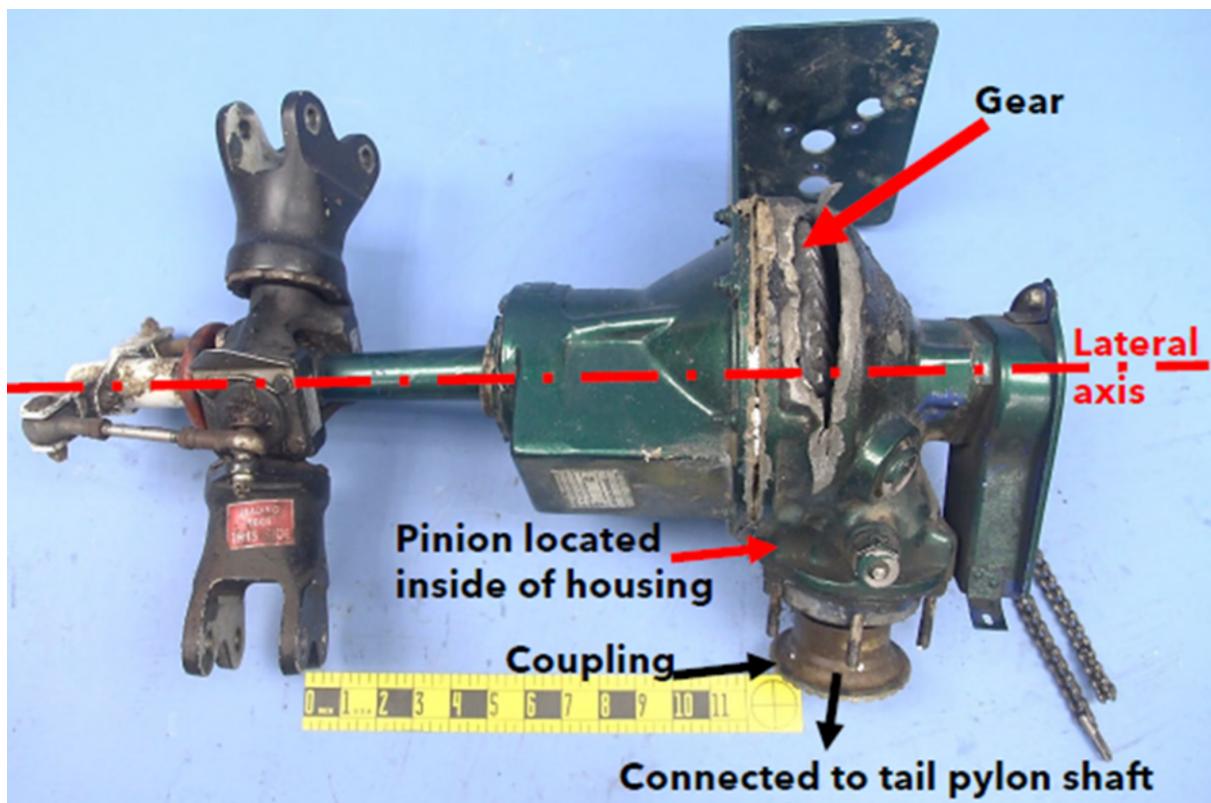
Overall view of the 90° gearbox assembly showing a portion of the exposed gear that breached the gearbox housing.
